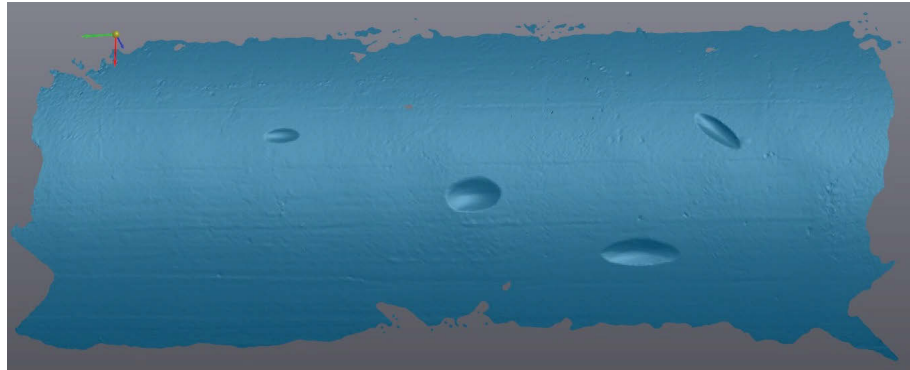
Laser scan of machined ellipsoidal defects
